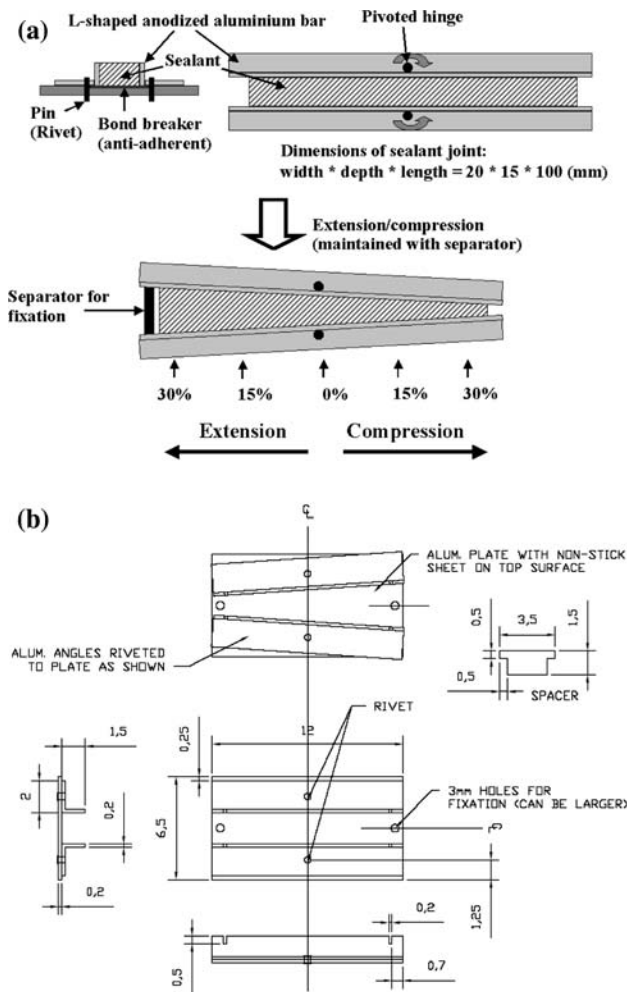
(a) Schematic drawing of test specimen: sealant in anodised aluminium support used for cyclic mechanical movement of sealant, (b) engineering drawing of support (all
